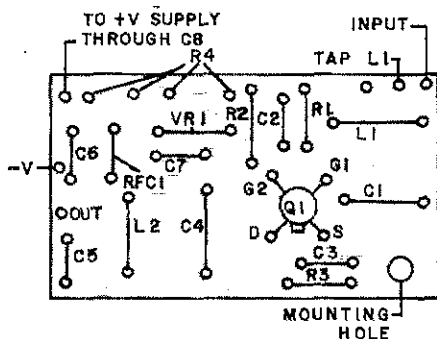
Full-scale layout and parts placement guide for the pc board. Foil side shown.
